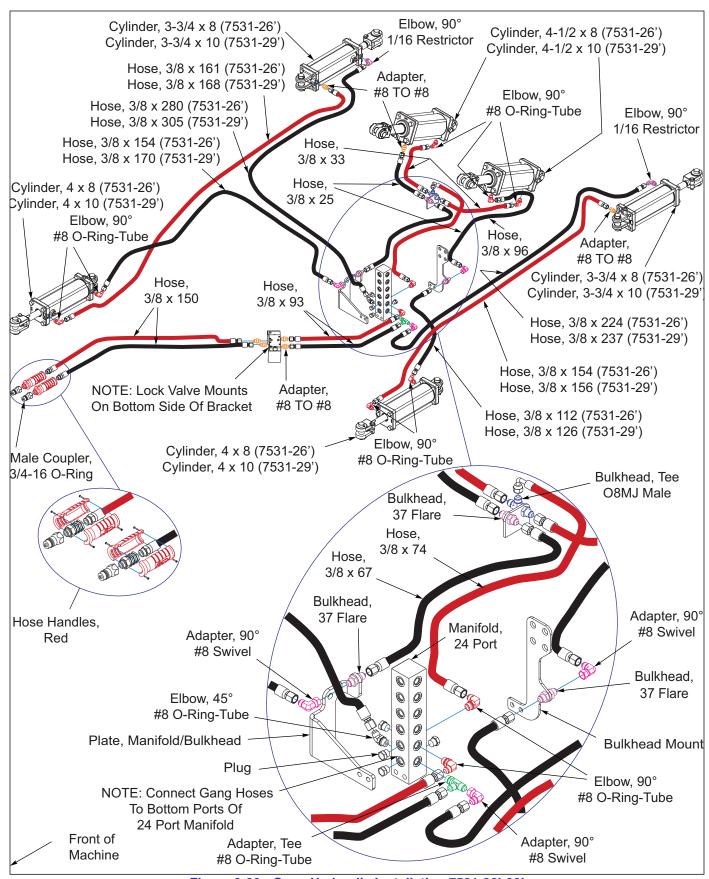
Gang Hydraulic Installation 7531-26'-29'
